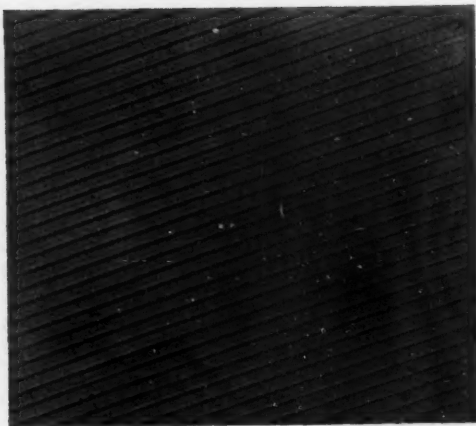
Photomicrograph, at About 250X Magnification, of the Surface of a Flat Plastics Disc Machined with a Diamond Tool on the Precision Lathe, Showing the Uniform Groove Width from which the Very Low Value for Axial Spindle Movement can be Deduced
